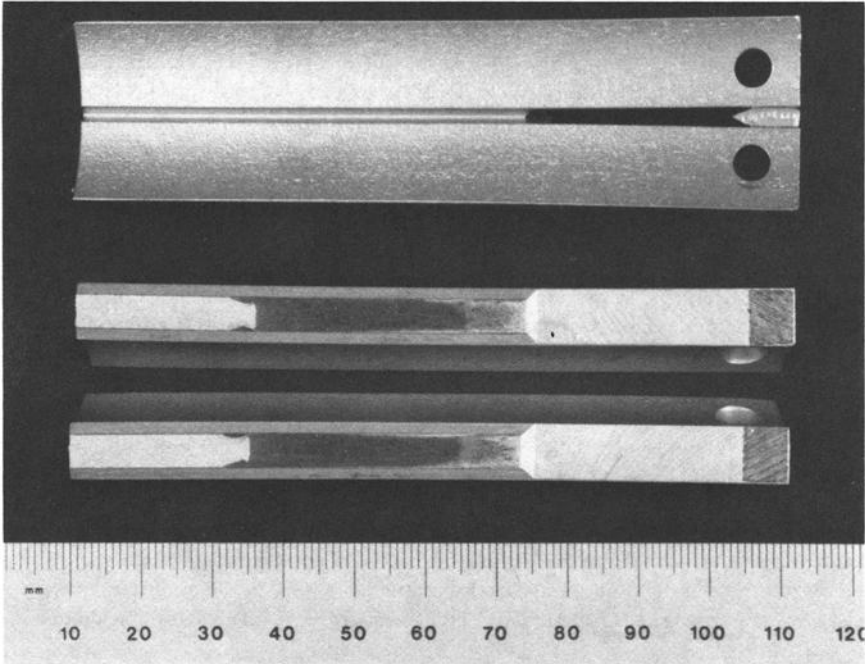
Wedge-loaded, fatigue precracked DCB specimens for sour gas cracking tests of alloys. Note that specimens are curved because they were obtained full wall from alloy tubulars. Specimens are heavily side-grooved to prevent crack branching. Fractured specimen shows typical SCC arrest.
